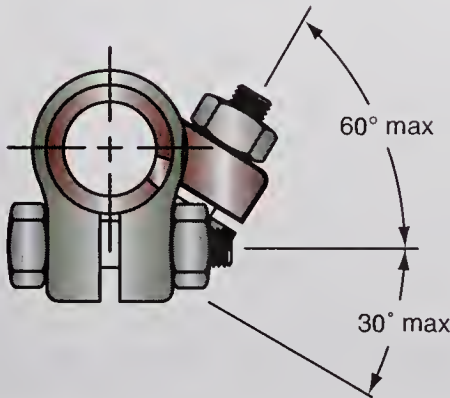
Proper tie-rod adjusting sleeve and clamp position.
